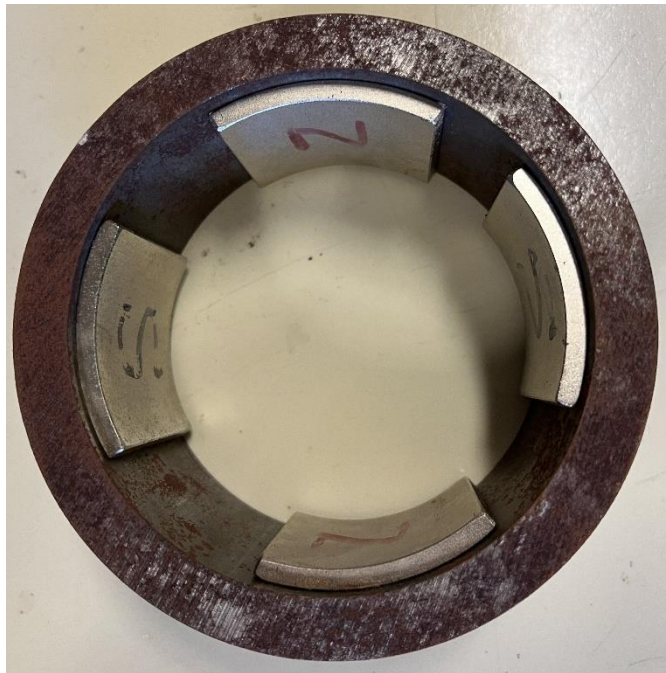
Magnet Arrangement Installed on the Outer Rotor (Example)
